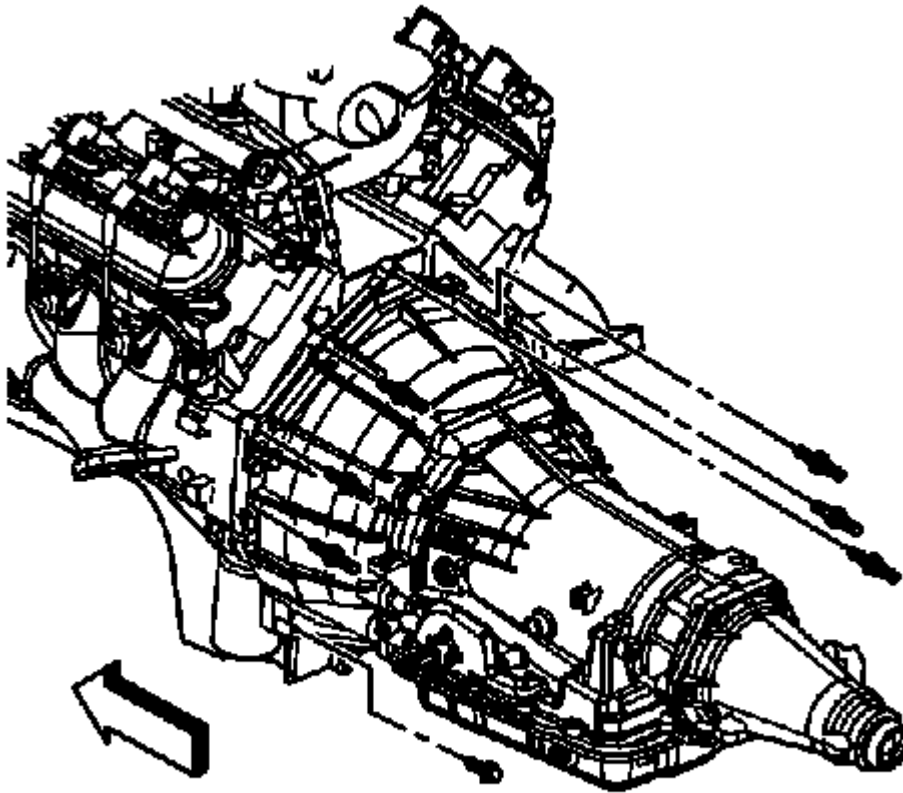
Identifying Six Studs & One Bolt Securing Transmission To Engine
